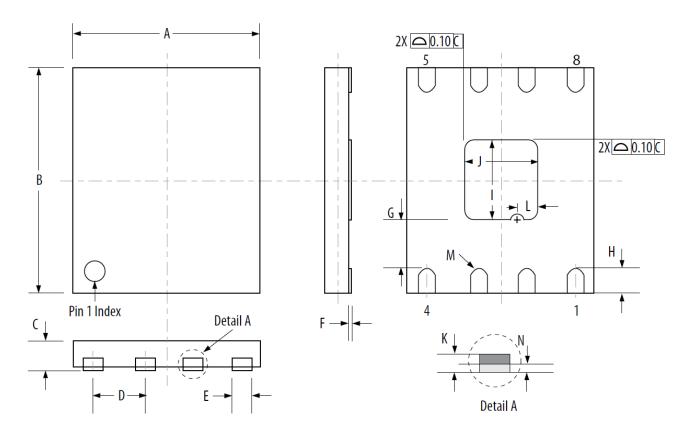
PACKAGE OUTLINE 5x6 mm 8-LAND DFN SMALL FLAG (DESIGNATOR DF)
